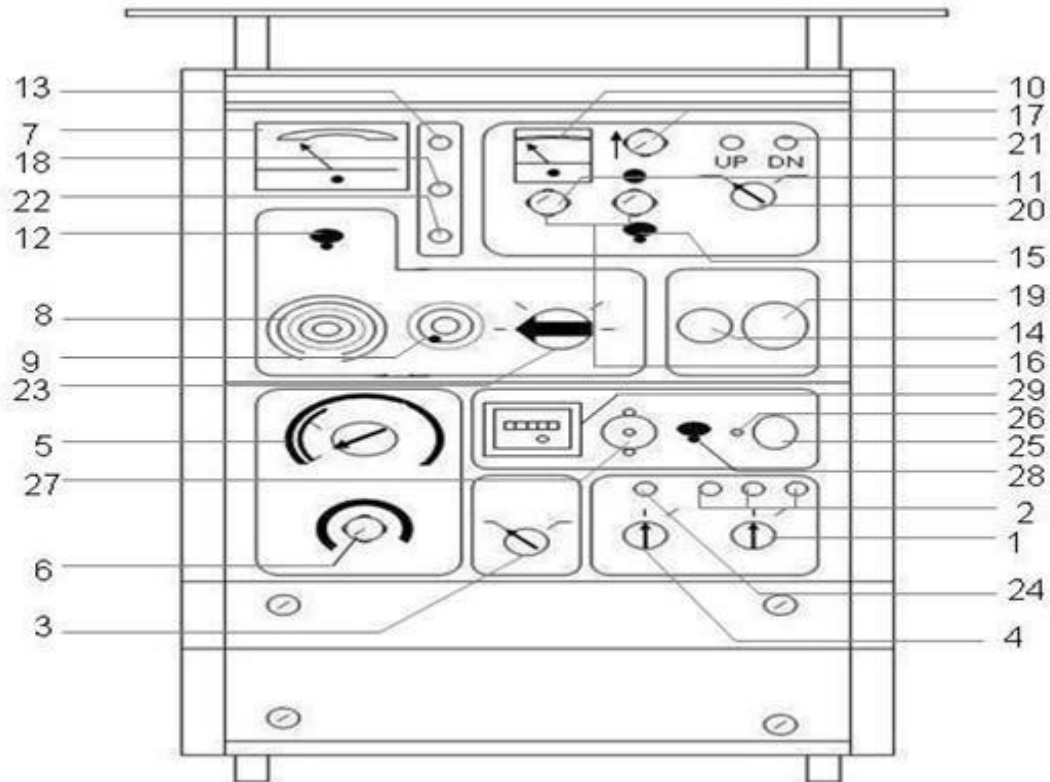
Indicating the controls of EDM (Model No. T – 3822M)
